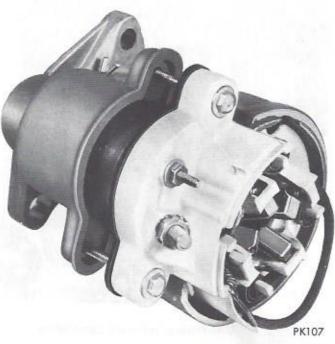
Removing Solenoid and Brush Plate Assembly From Gear Housing
